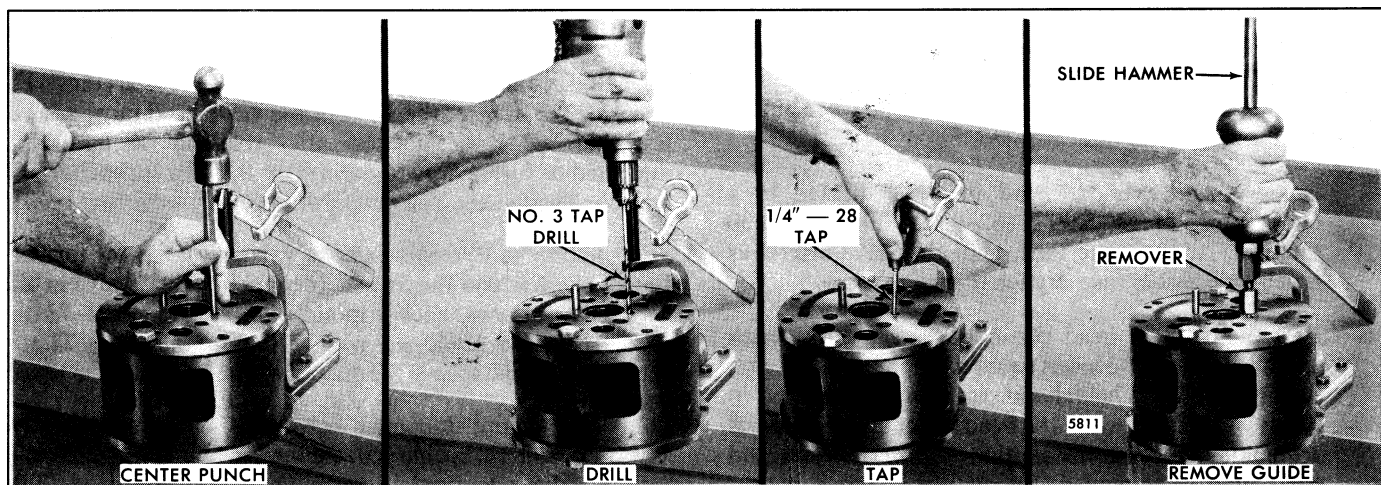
Removing Broken Exhaust Valve Bridge Guide
